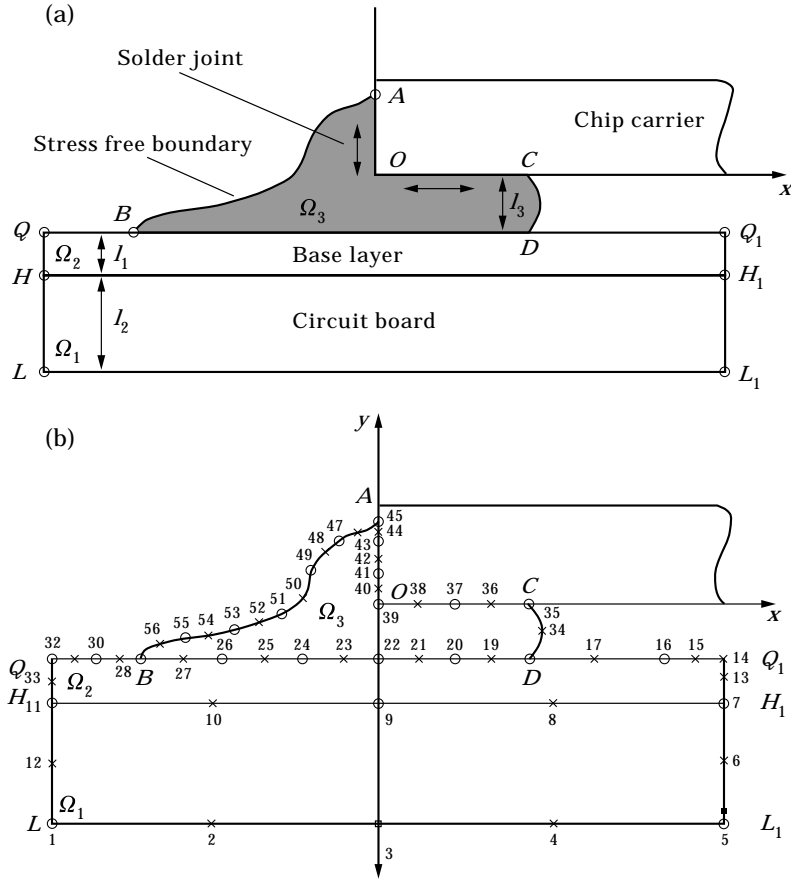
(a) Solder joint cross-section geometry (problem 2). (b) The BE-mesh (problem 2).
